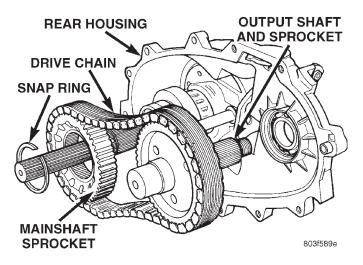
Front Output Shaft, Drive Gear And Chain Removal
